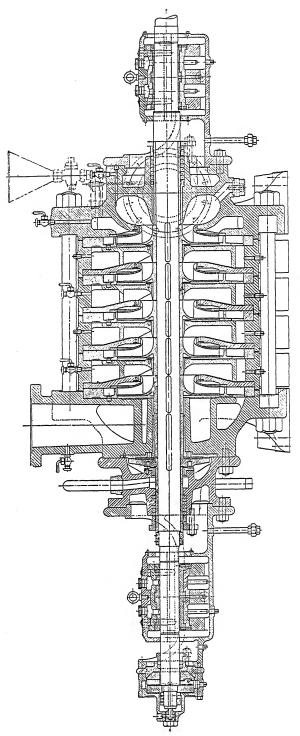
Section through Type "ST" Multi-stage Centrifugal Pump
